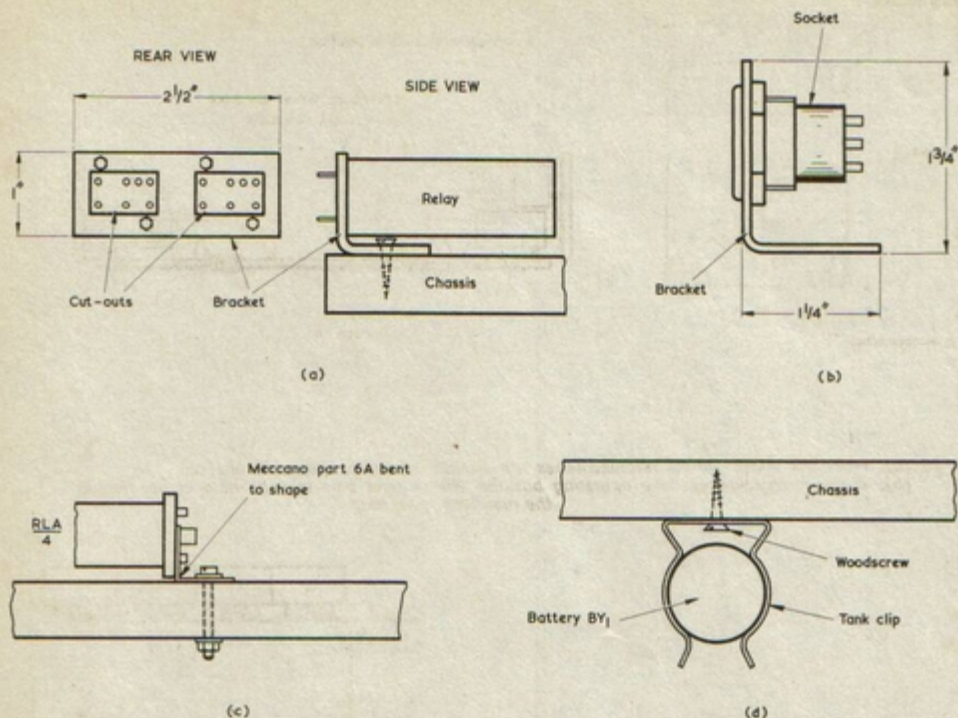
(a). The Perspex bracket on which relays RLB and RLC are mounted
